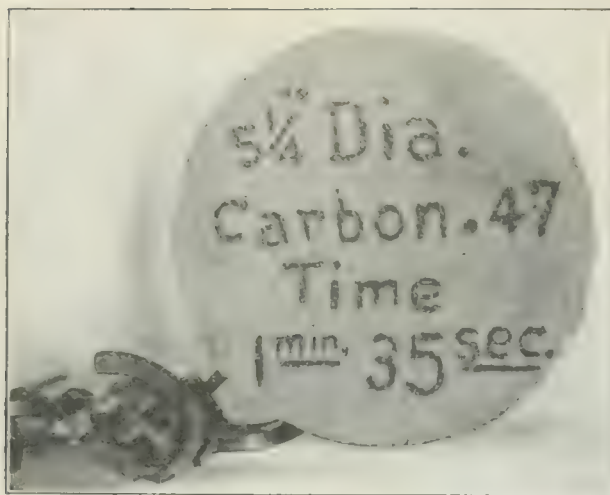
A Specimen Cut, Showing the Steady Motion of the Blade.
